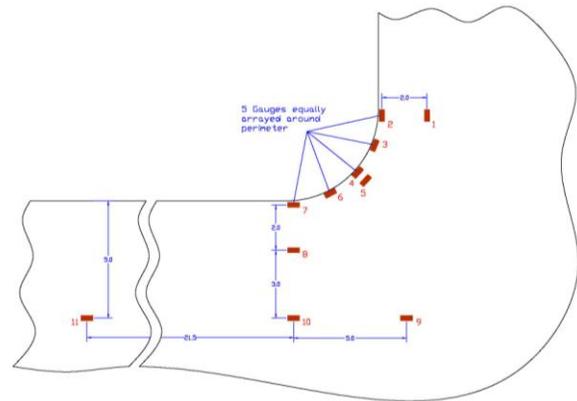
Door 5, Lower Corner Gauge Detail (11 gauges)
